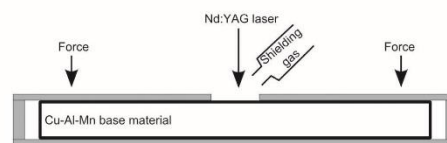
Schematics of fixture, laser and shielding gas position for the welding experimental setup.
